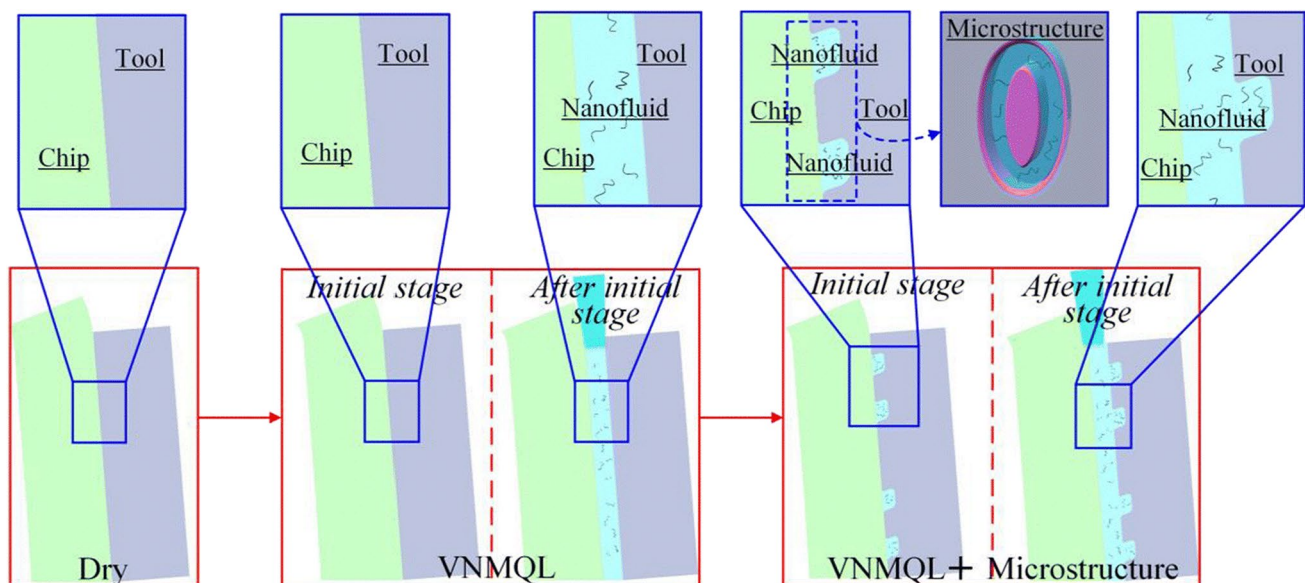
Friction interface between the textured tool and the workpiece [173]
